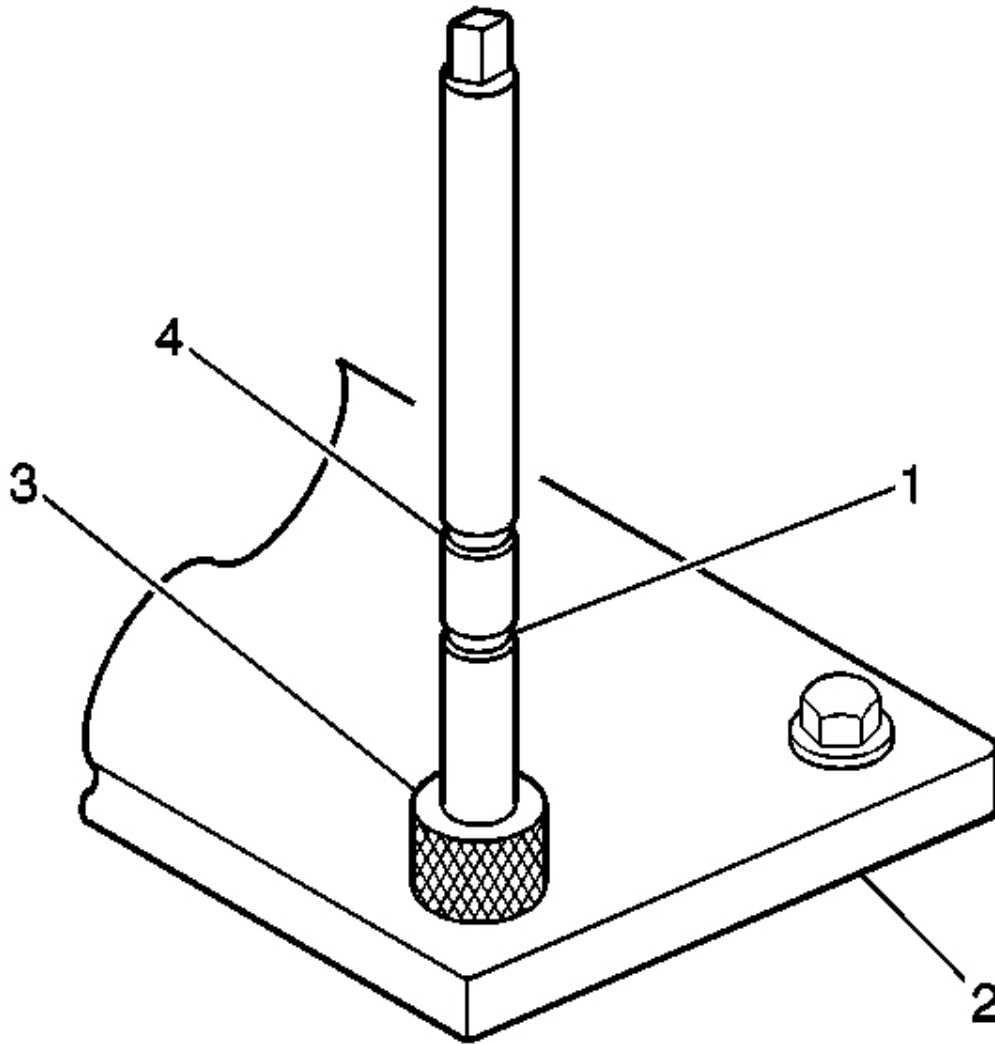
View Of Tap Upper & Lower Marks, Fixture Plate & Bushing
